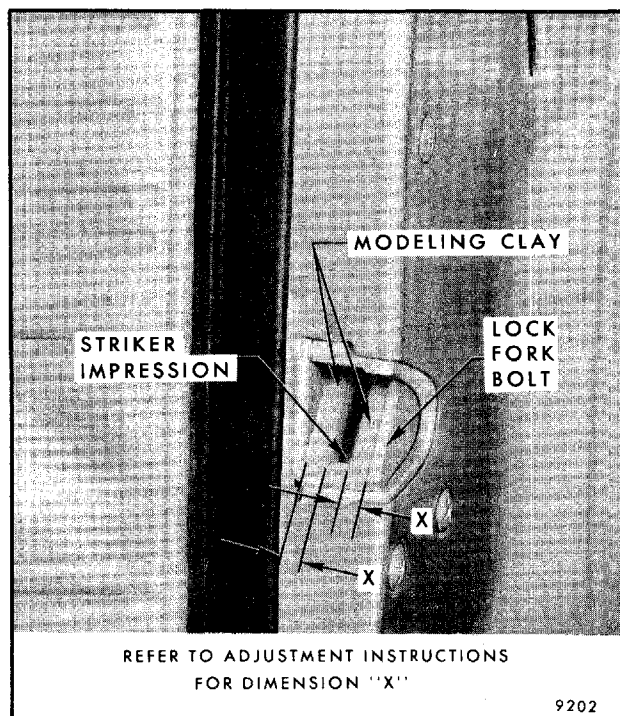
Lock-to-Striker Fore and Aft Adjustment
